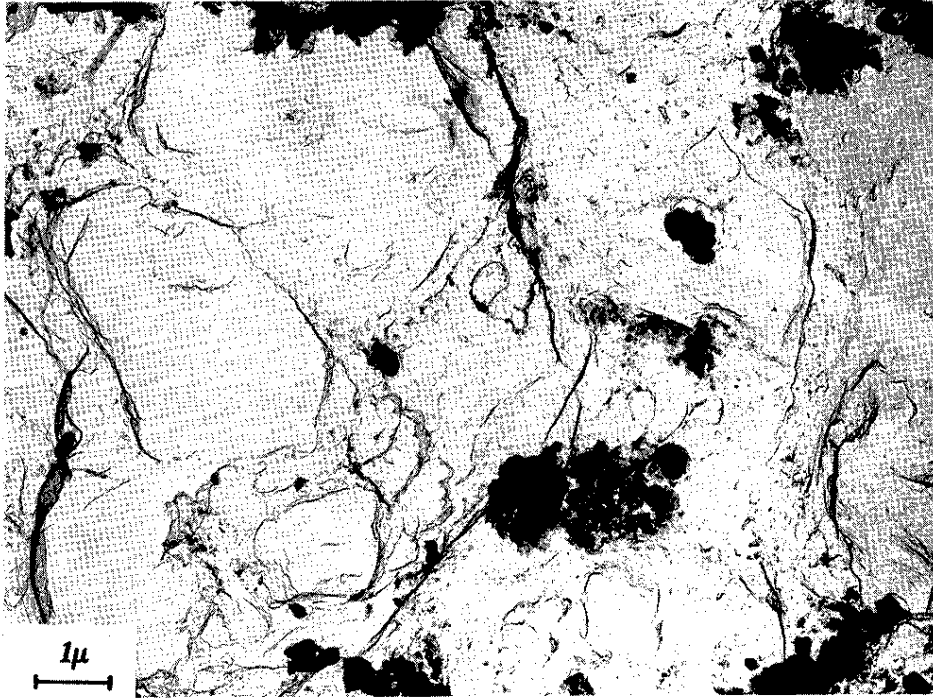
DIMPLED RUPTURE AND INTERGRANULAR FRACTURE IN 5/8-INCH BOLTS
